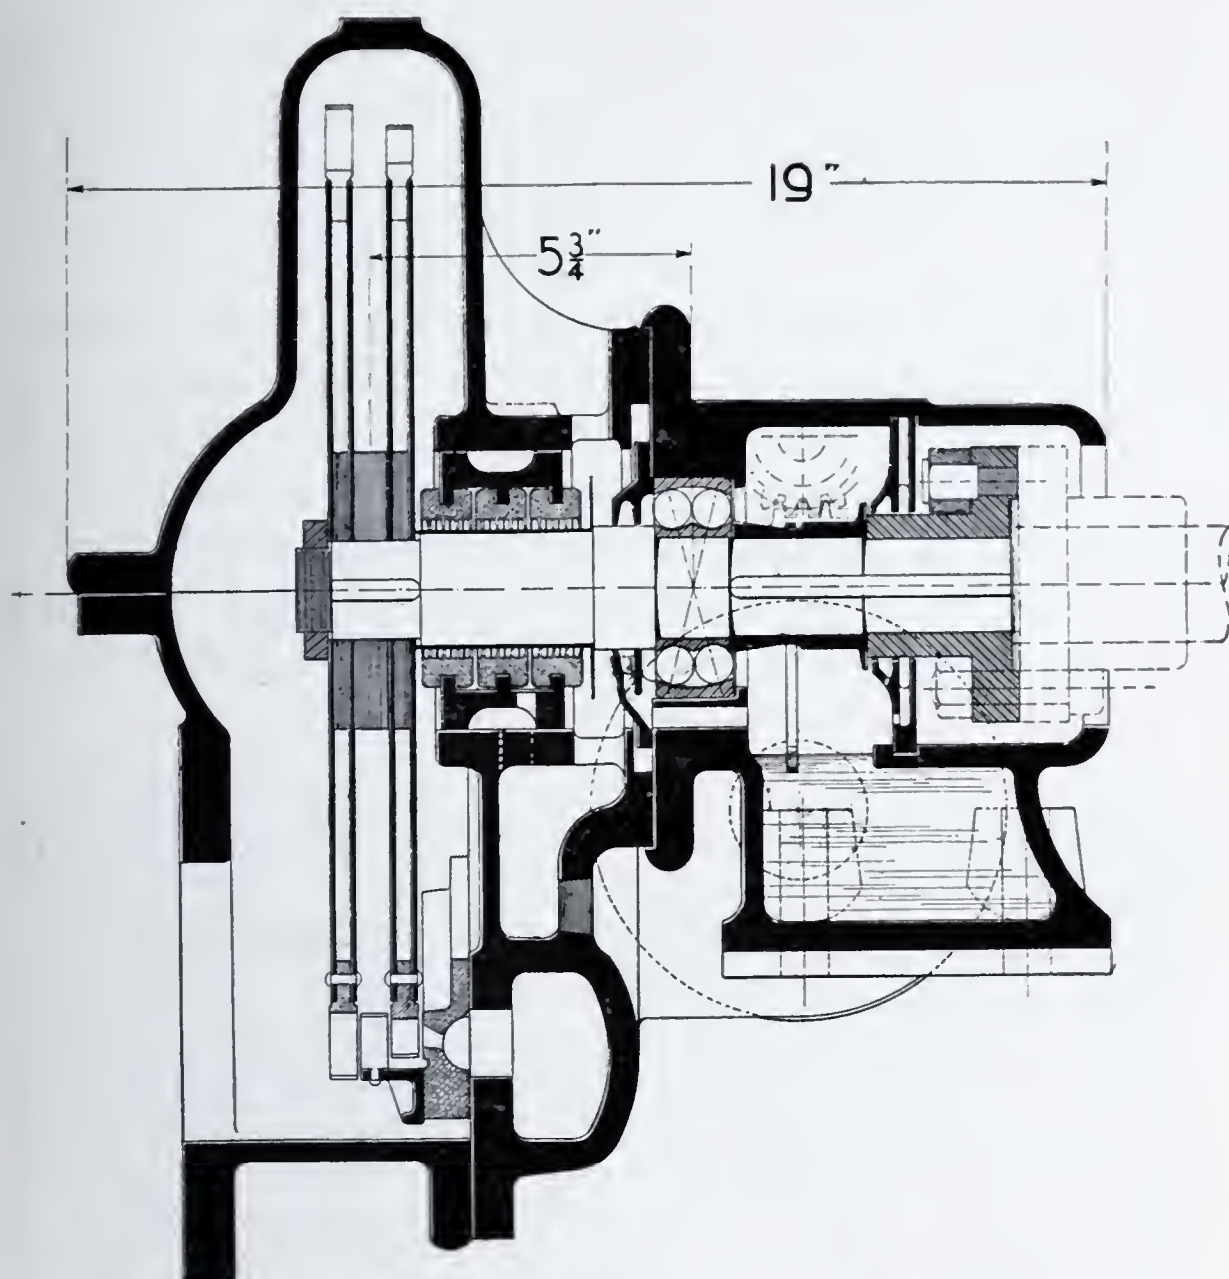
Section through Steam Motor Showing Method of Lubricating Ball-Bearing.
